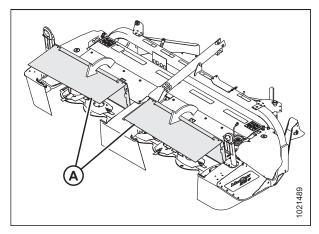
Cutterbar Doors — R113 SP Shown, R116 SP Similar
